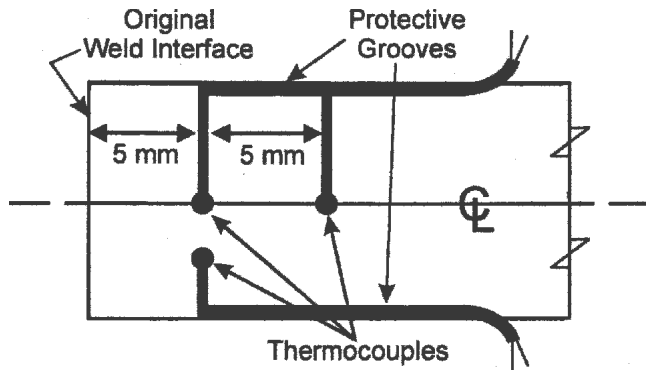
Schematic of the stationary weld specimen showing the locations of the three thermocouples and their protective longitudinal grooves.
